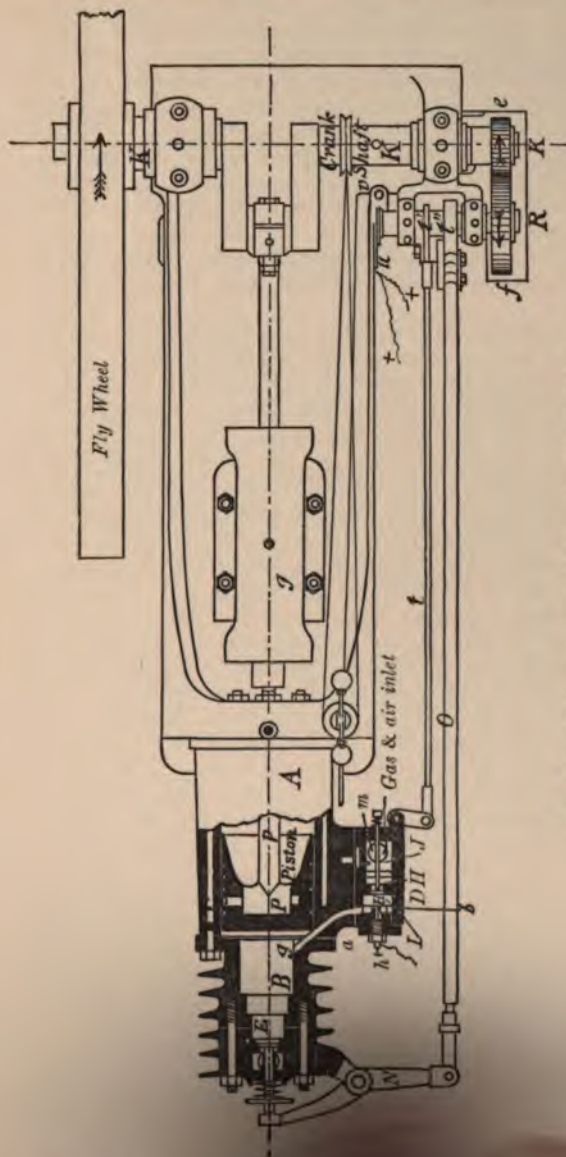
Modern Lenoir Engine—Sectional Plan.
